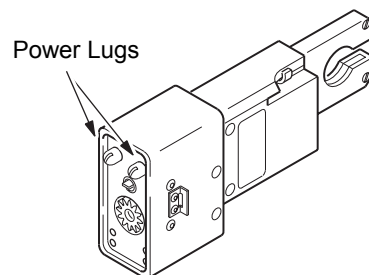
Cleaning the Weld Head Power Lugs
